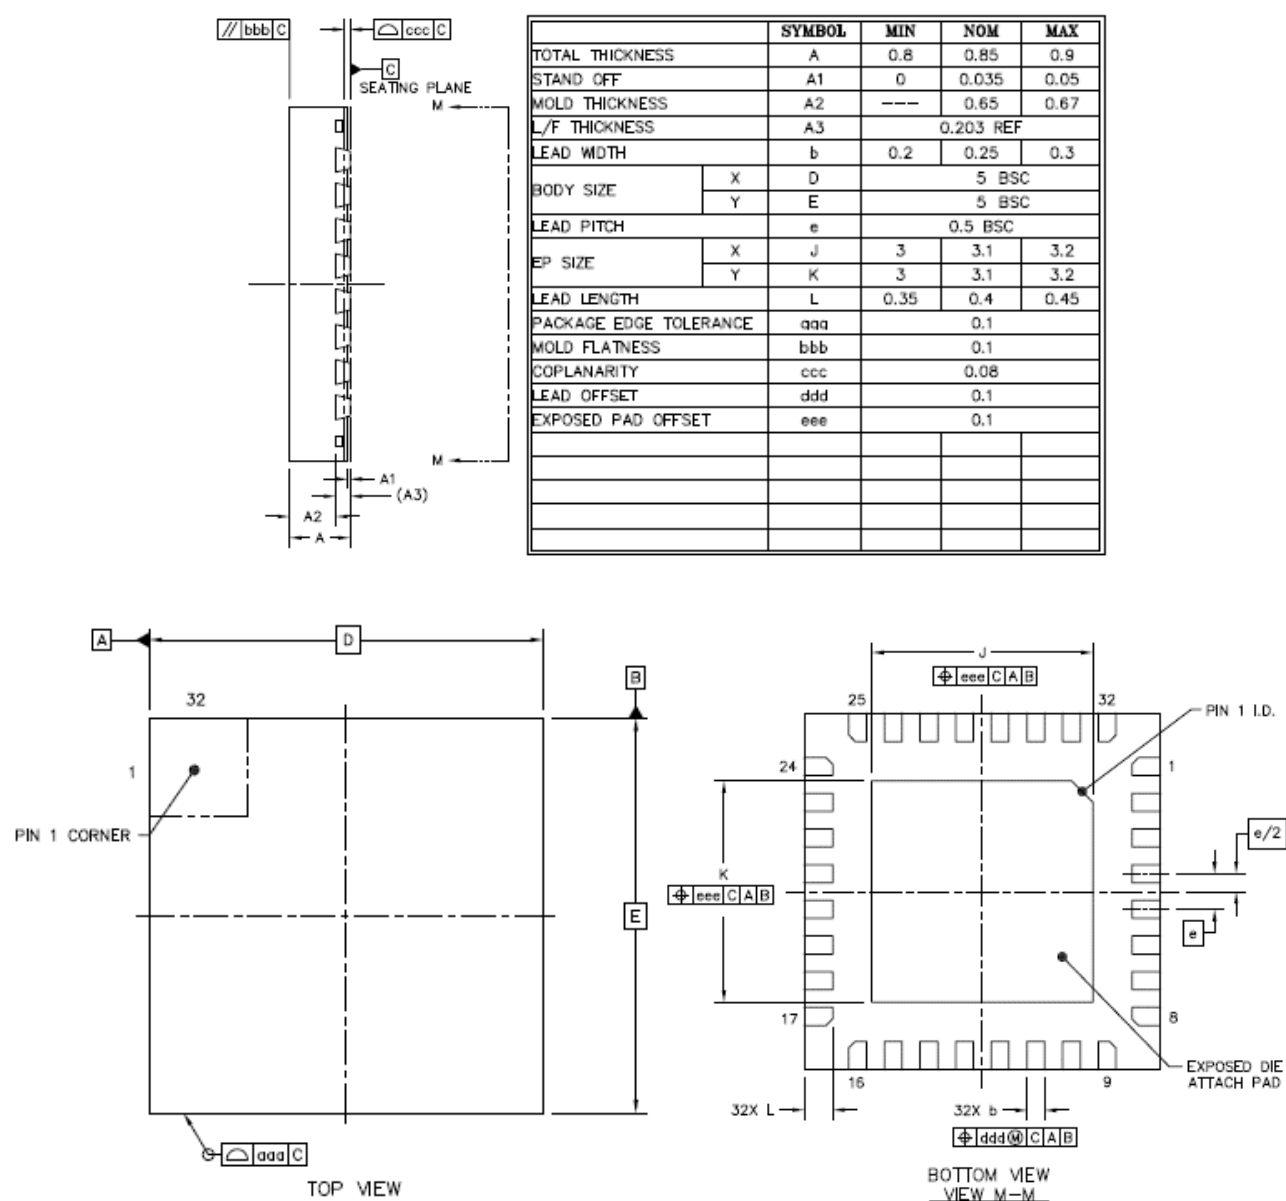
QFN (5mm x 5mm) 32-pin Package Dimensions
